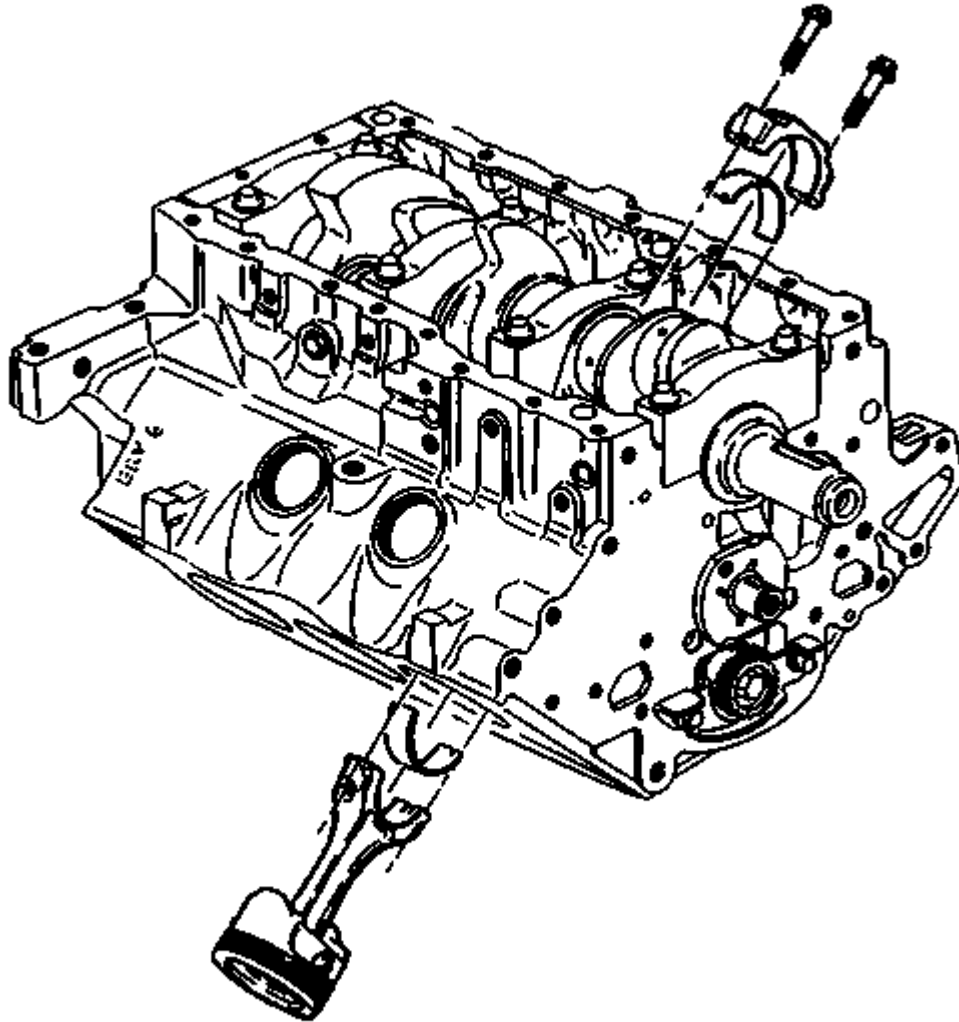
Installing Connecting Rod Bearing Cap & Bolts
